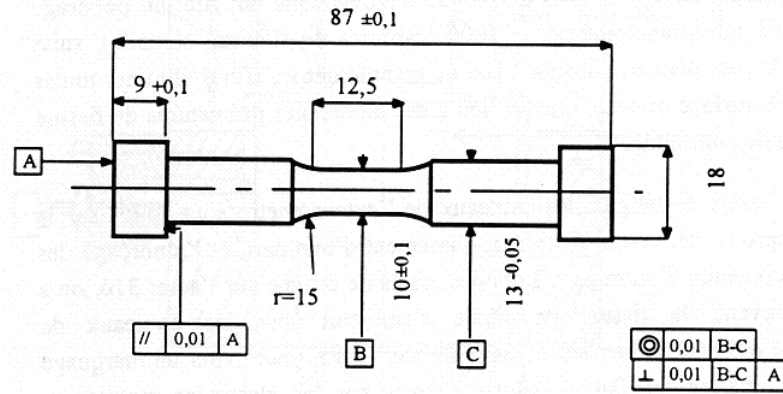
Classical specimen sketch for fatigue testing [Moussavi 97].
